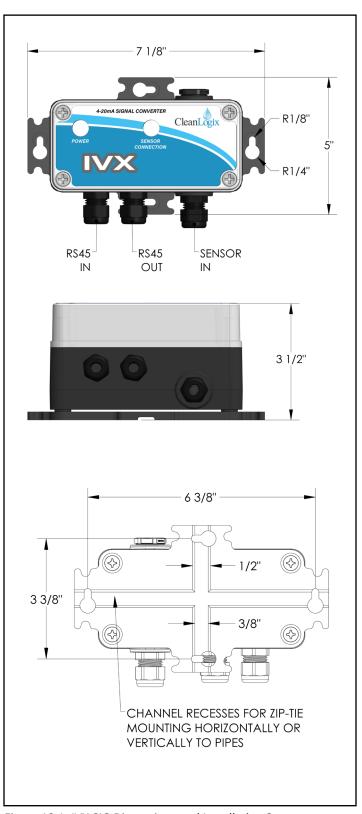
IVX-SIG Dimensions and Installation Set-up
